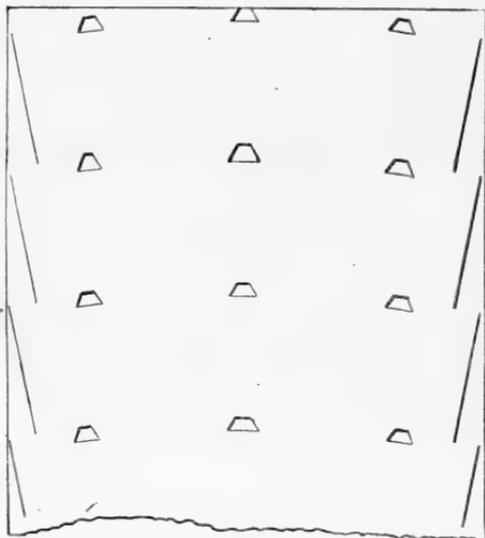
Drawing showing Sheet punched for Dovetail Notches and Slot for Segment Ends.
